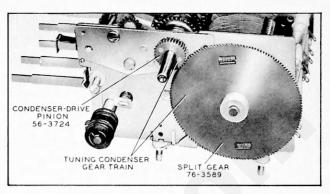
TUNING-CONDENSER GEAR TRAIN
